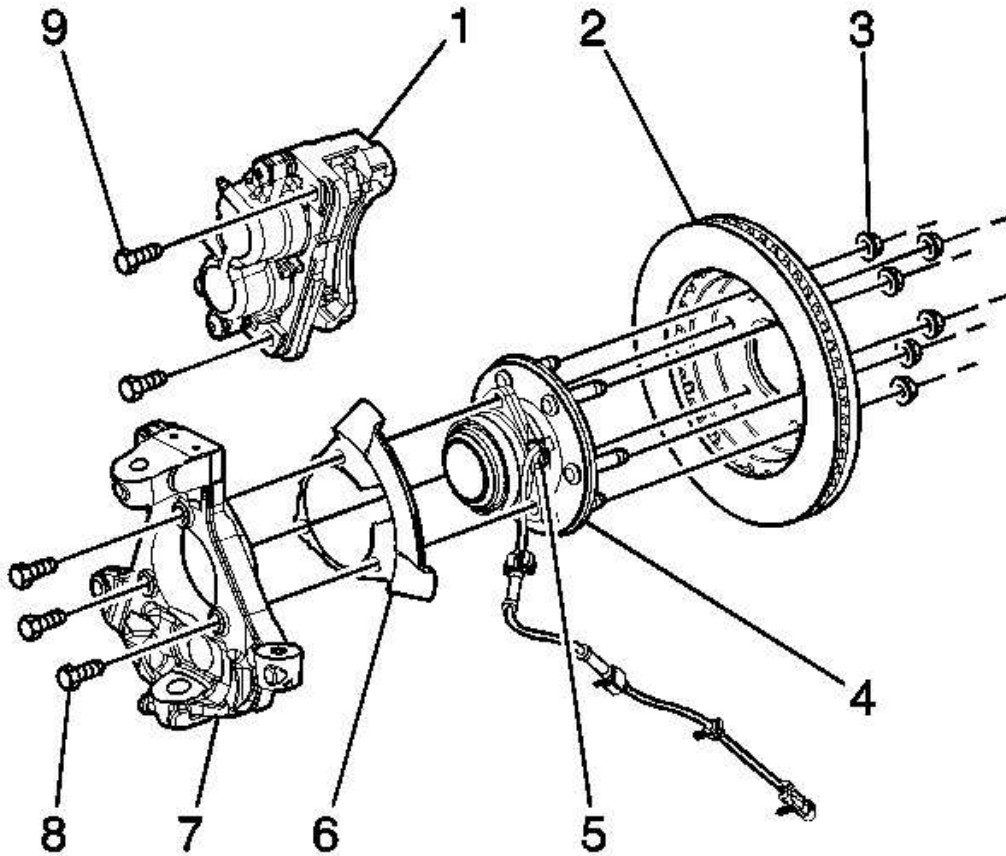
Remove The Wheel Hub Mounting Bolts (4WD, 15-Series)
